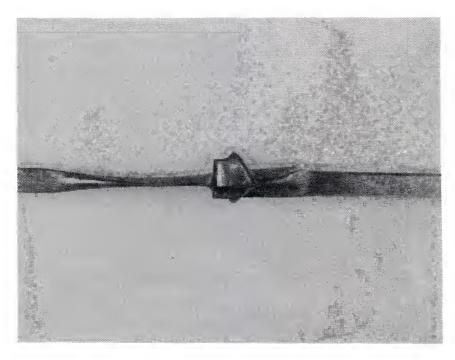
Root Forging in Ti6A14V Alloy Showing Complete Root Fill
